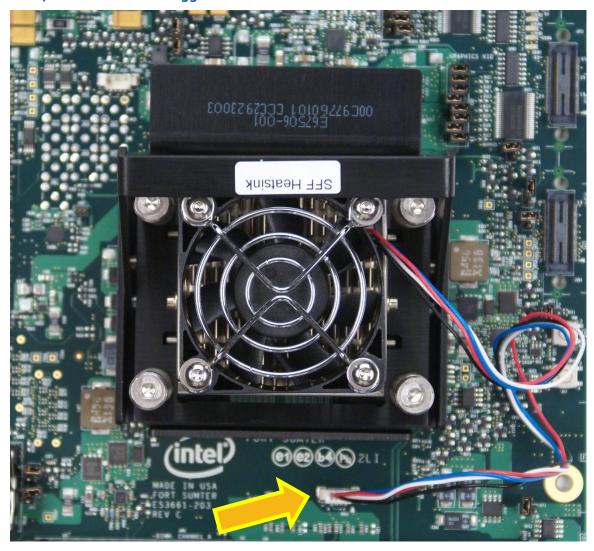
Completed Intel[®] Core[™] i7 Processor CRB With Fan/heatsink Assembly Installed
